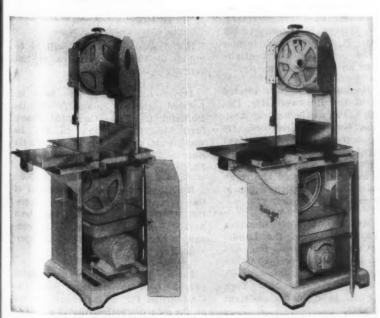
Original welded design (left) and latest welded design (right) with covers open to show interiors.
